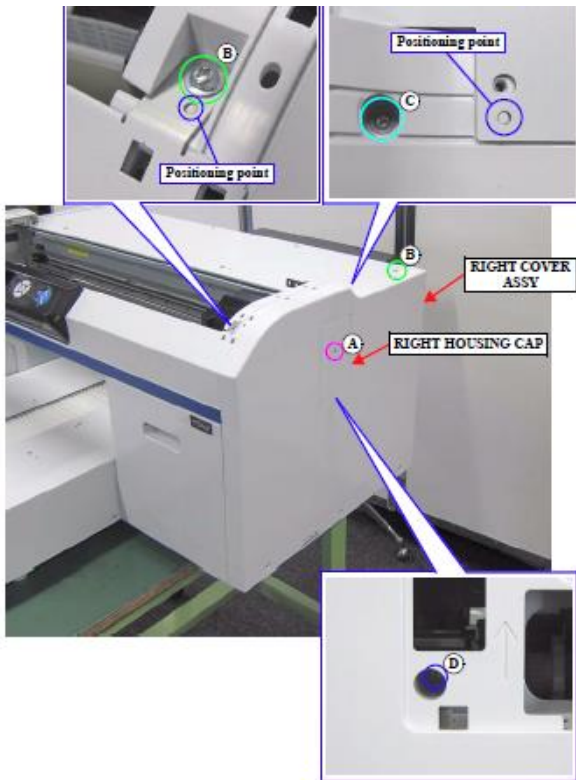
Removing the RIGHT HOUSING CAP / RIGHT COVER ASSY
